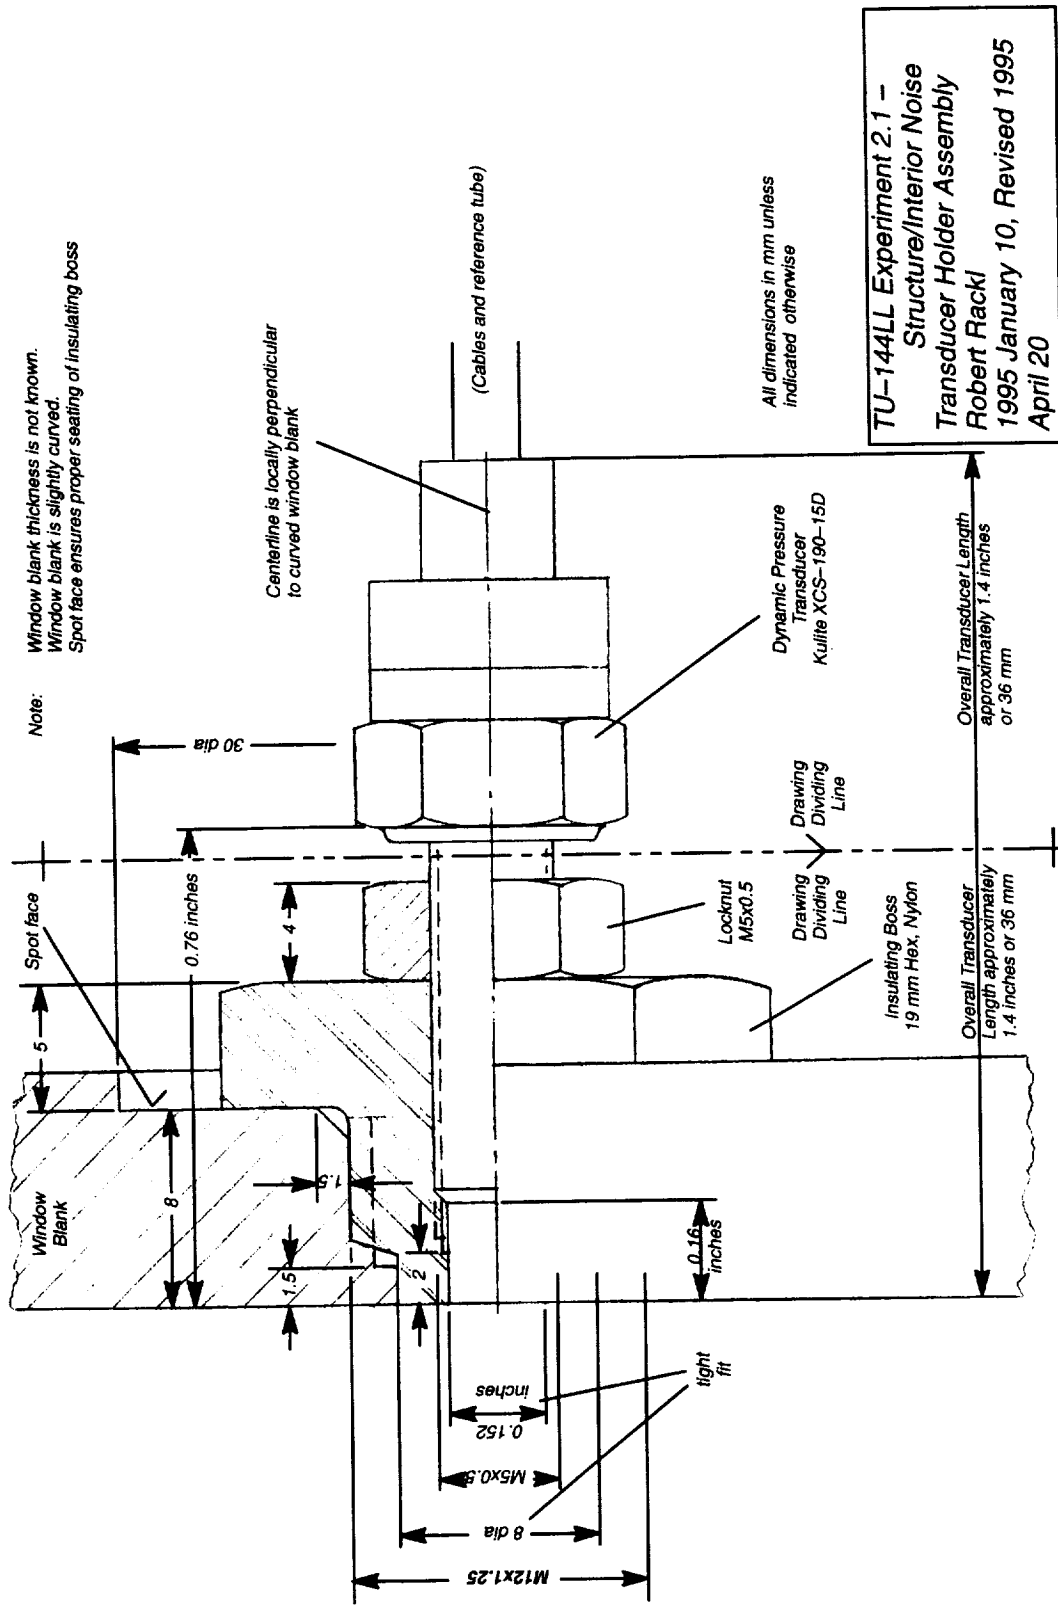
Drawing of Kulite transducer insulating/mounting boss.
